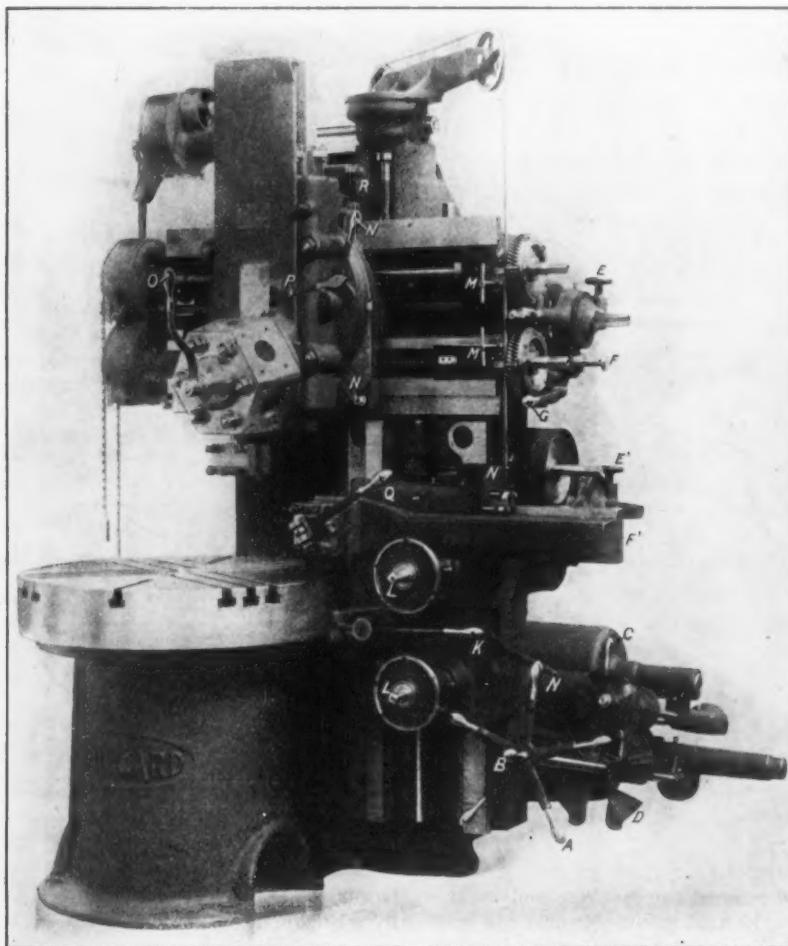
The 36 In. Rapid Production Vertical Turret Lathe Built by the Bullard Machine Tool Company, Bridgeport, Conn.
